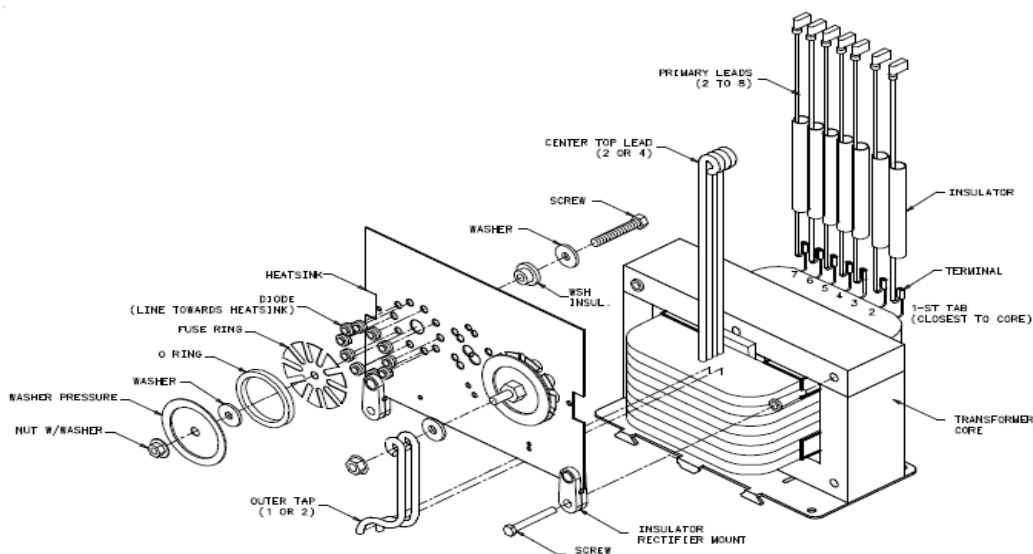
Transformer connected to rectifier assembly in an Associated Equipment charger
